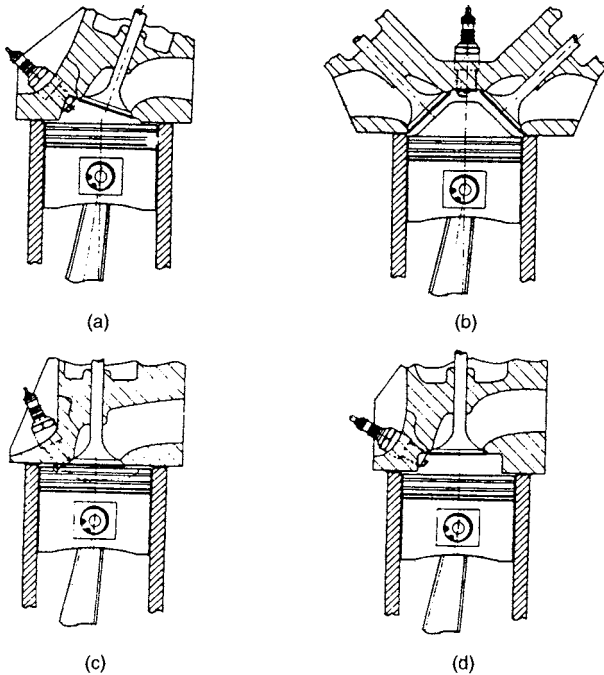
Classical combustion chambers for spark-ignition engines; (a) Wedge; (b) hemispherical head; (c) bowl in piston; (d) bathtub head. (Courtesy: R. Stone, SAE, 1995.)
